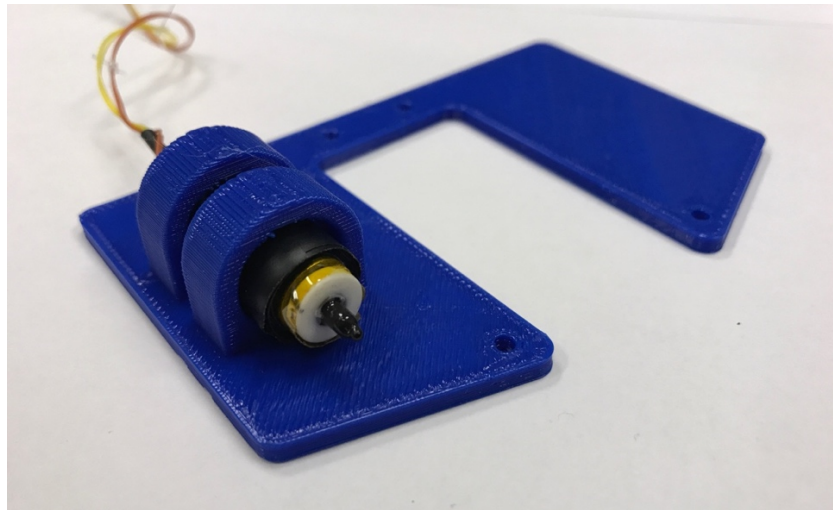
Finalized Geiger Muller tube attachment for System A.
